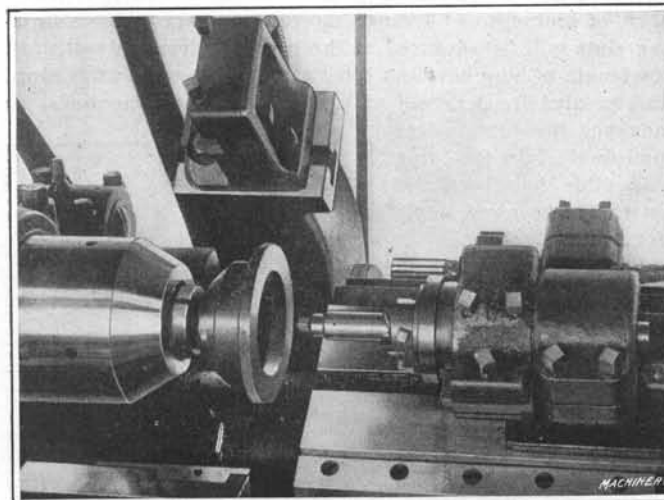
Standard Holder carrying Reamer and Counterboring Tool
